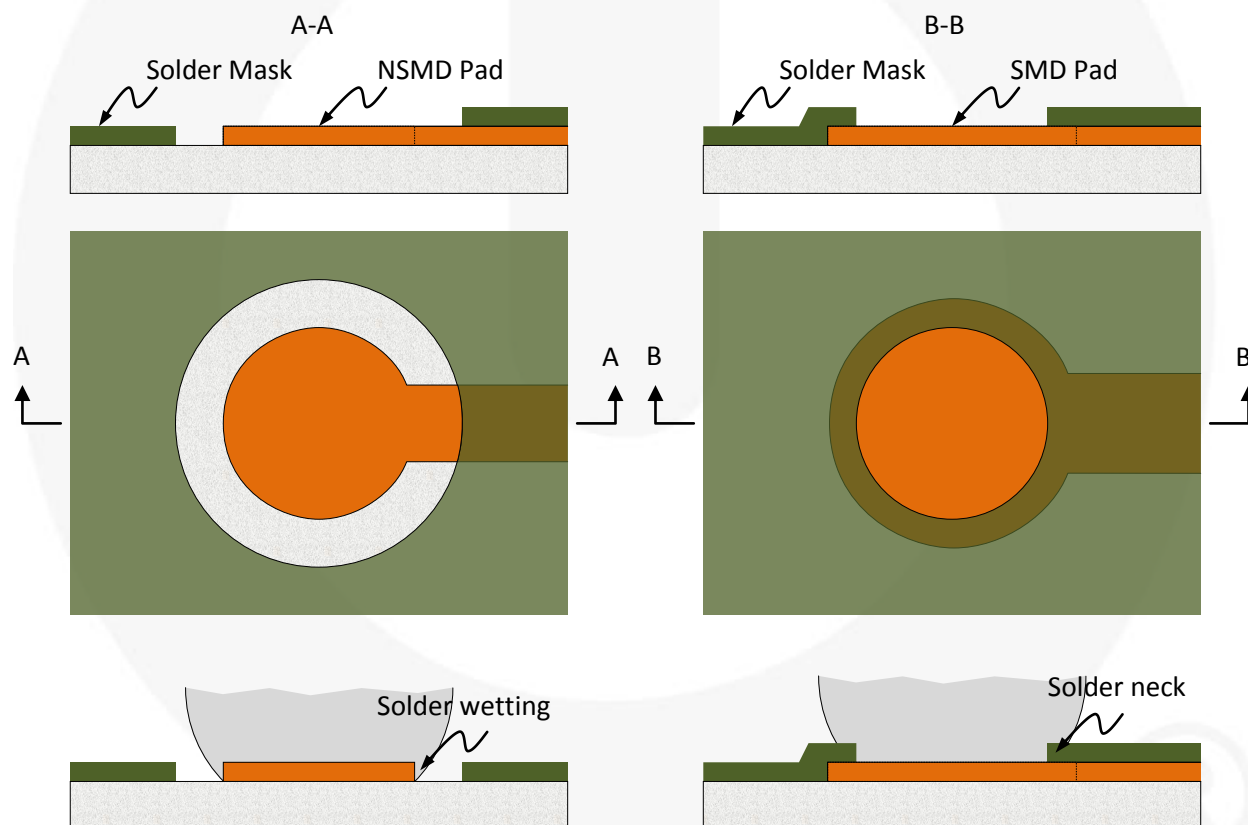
Top View and Cross-Sectional View of NSMD and SMD PCB Pad Designs, Solder Wetting on Side Walls of NSMD Pad, and Solder Neck on SMD Pad
